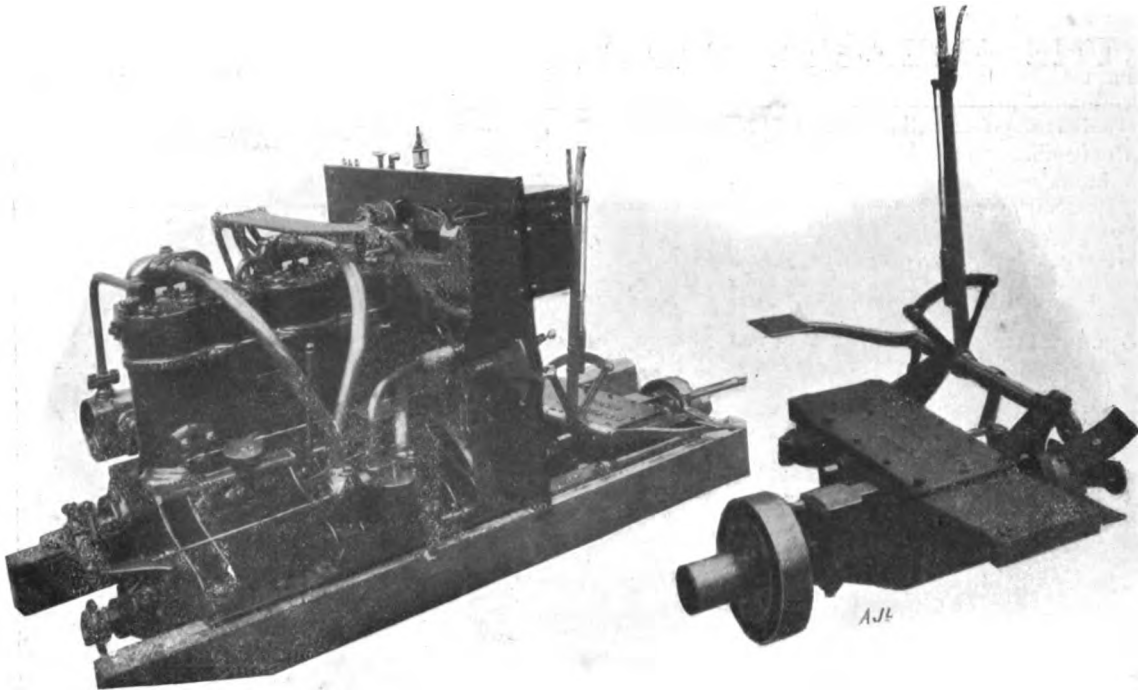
The 20-m.p. Napier Marine Motor, complete with its reversing-gear, and a larger view of the reversing-gear, separately.
